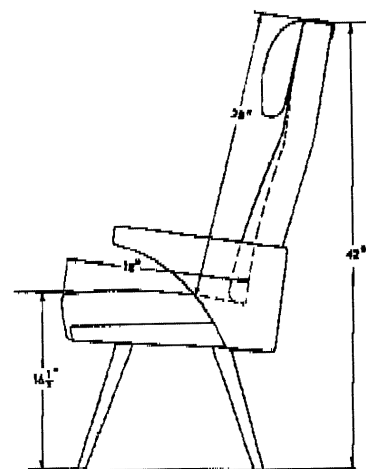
(g) - Seat type G, Model 6602-C, manufactured by the American Seating Co., Grand Rapids, Mich.
